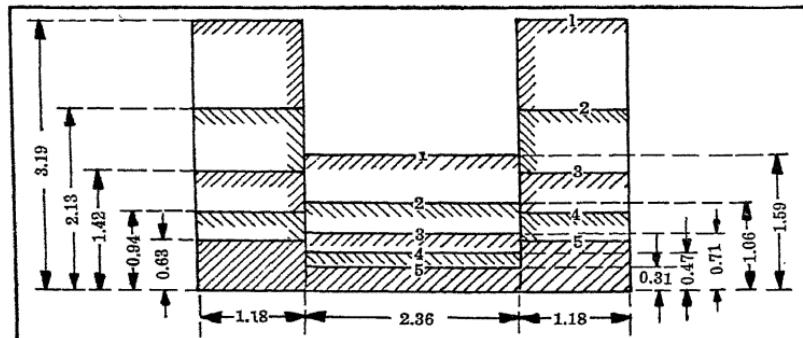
Diagram Showing Uniform Draft Distribution Over All Cross-Sectional Parts of a Shape
